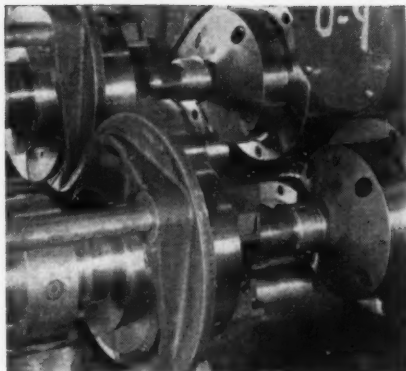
Two self-opening die heads in the fifth position on an open-end chucking machine. Large yokes trip die head when bottom of thread is reached.
